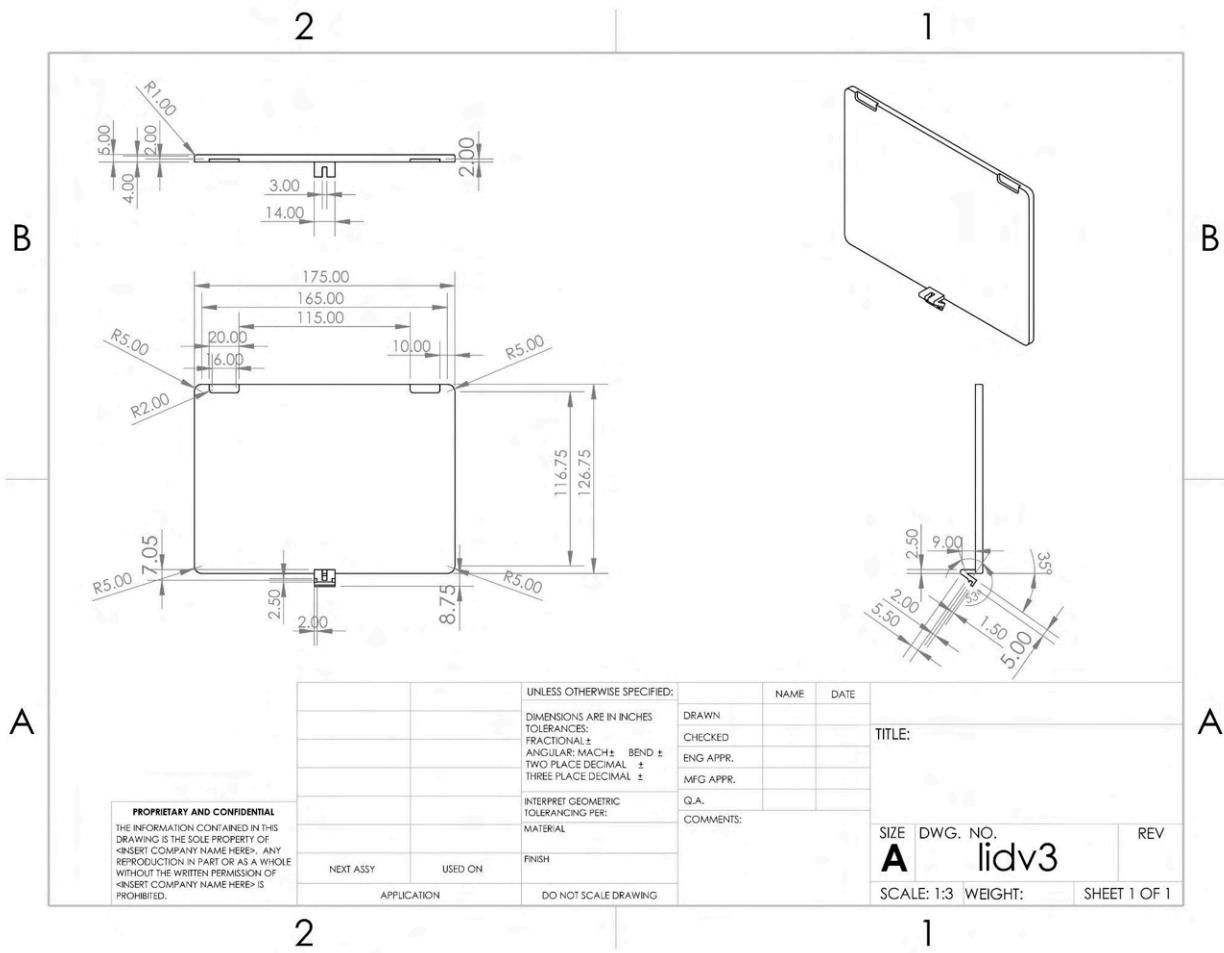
Mother Housing lid. Dimensions in mm. (added dimensions)
